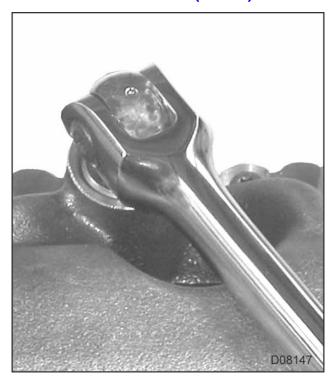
Removing crankcase-to-head tube plug (square head socket shown)
